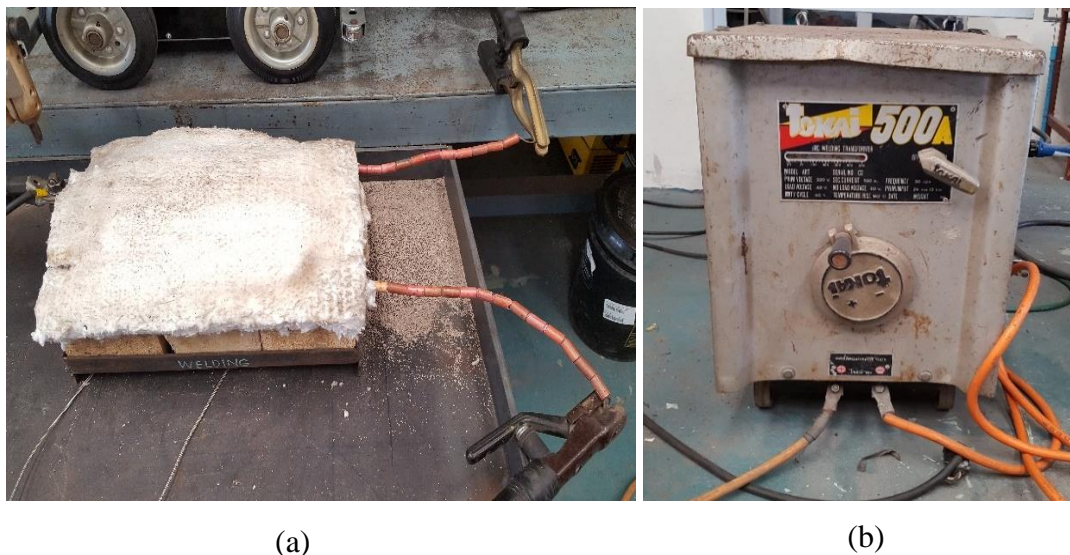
Preheating process (a) preheating before welding (b) arc welding transformer for preheating
